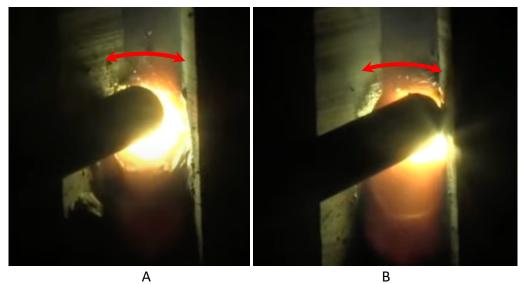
(Collier, 2015 1:06). A and B showing welding electrode movement from side to side (red arrows). The gap between plates is ¼ inch and the welding electrode is 1/8-inch diameter. Electrode motion is about 1/8 inch from side to side to ensure side wall tie in.
